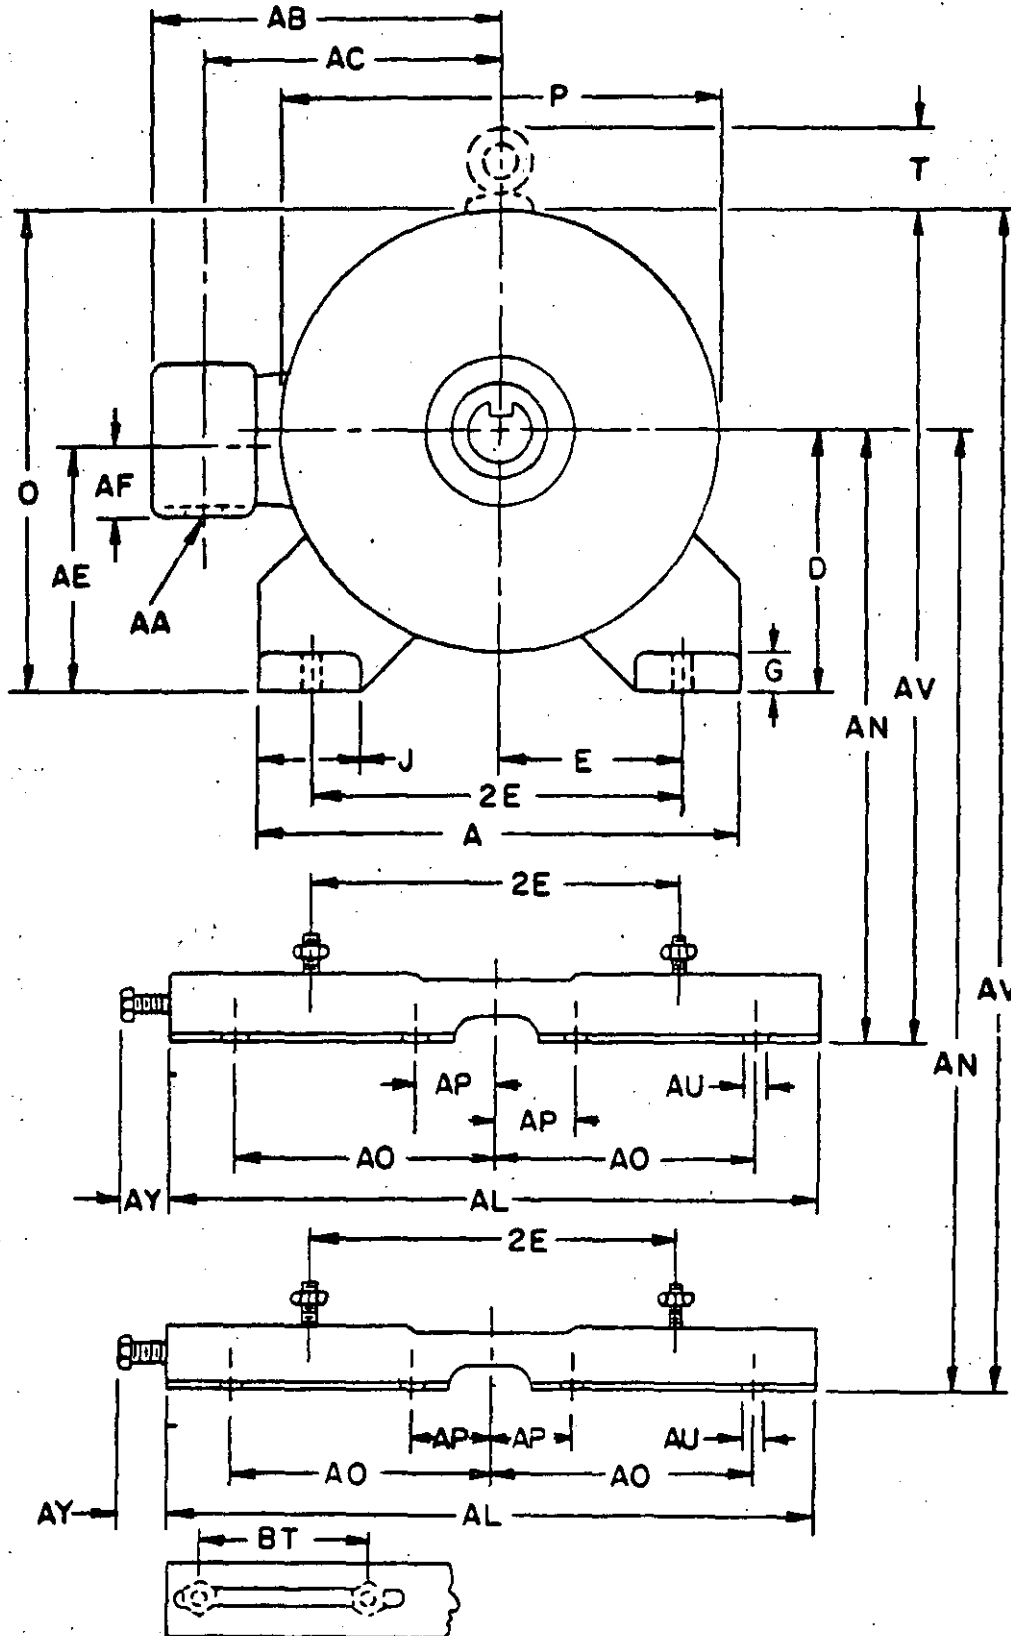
Lettering of Dimension Sheets for Foot-mounted Machines—Drive End View.
